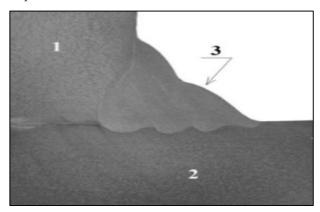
Macroscopic image of a fillet weld cross-section (1 flange, 2 shaft, 3 weld)
